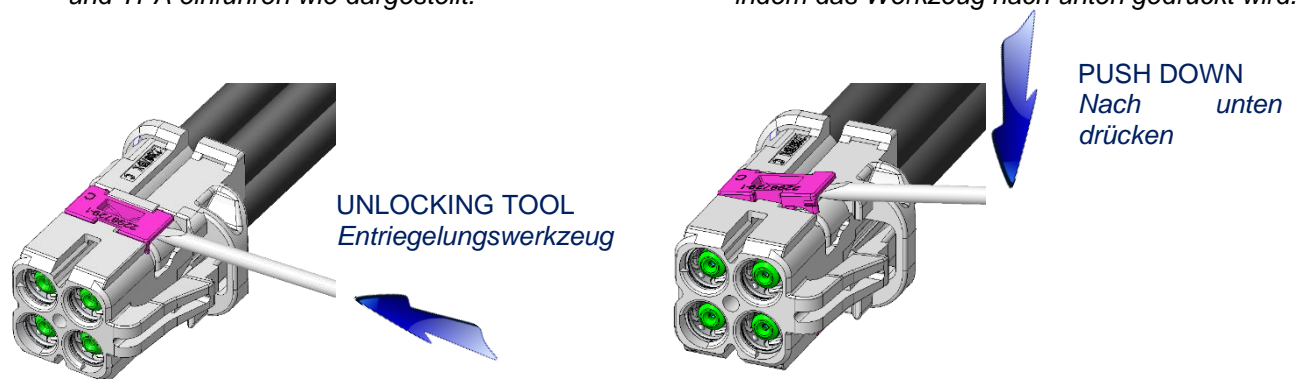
REMOVE TPA WITH UNLOCKING TOOL
